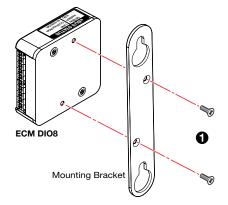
Attaching the Mounting Bracket to the ECM DIO8
